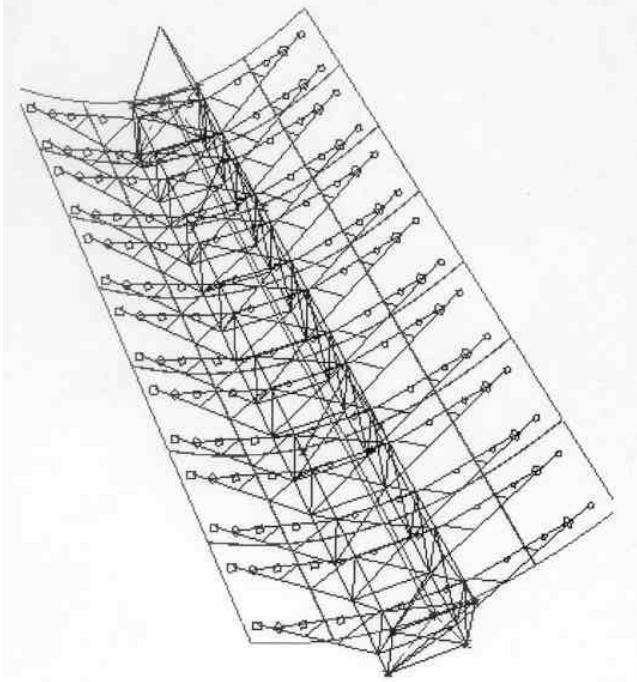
Sketch of the EURO TROUGH collector torque-box design: Central element is a steel construction which absorbs torsion and bending forces. The reflector panels are supported with attached arms, using a type of fixation to reduce breakage.
